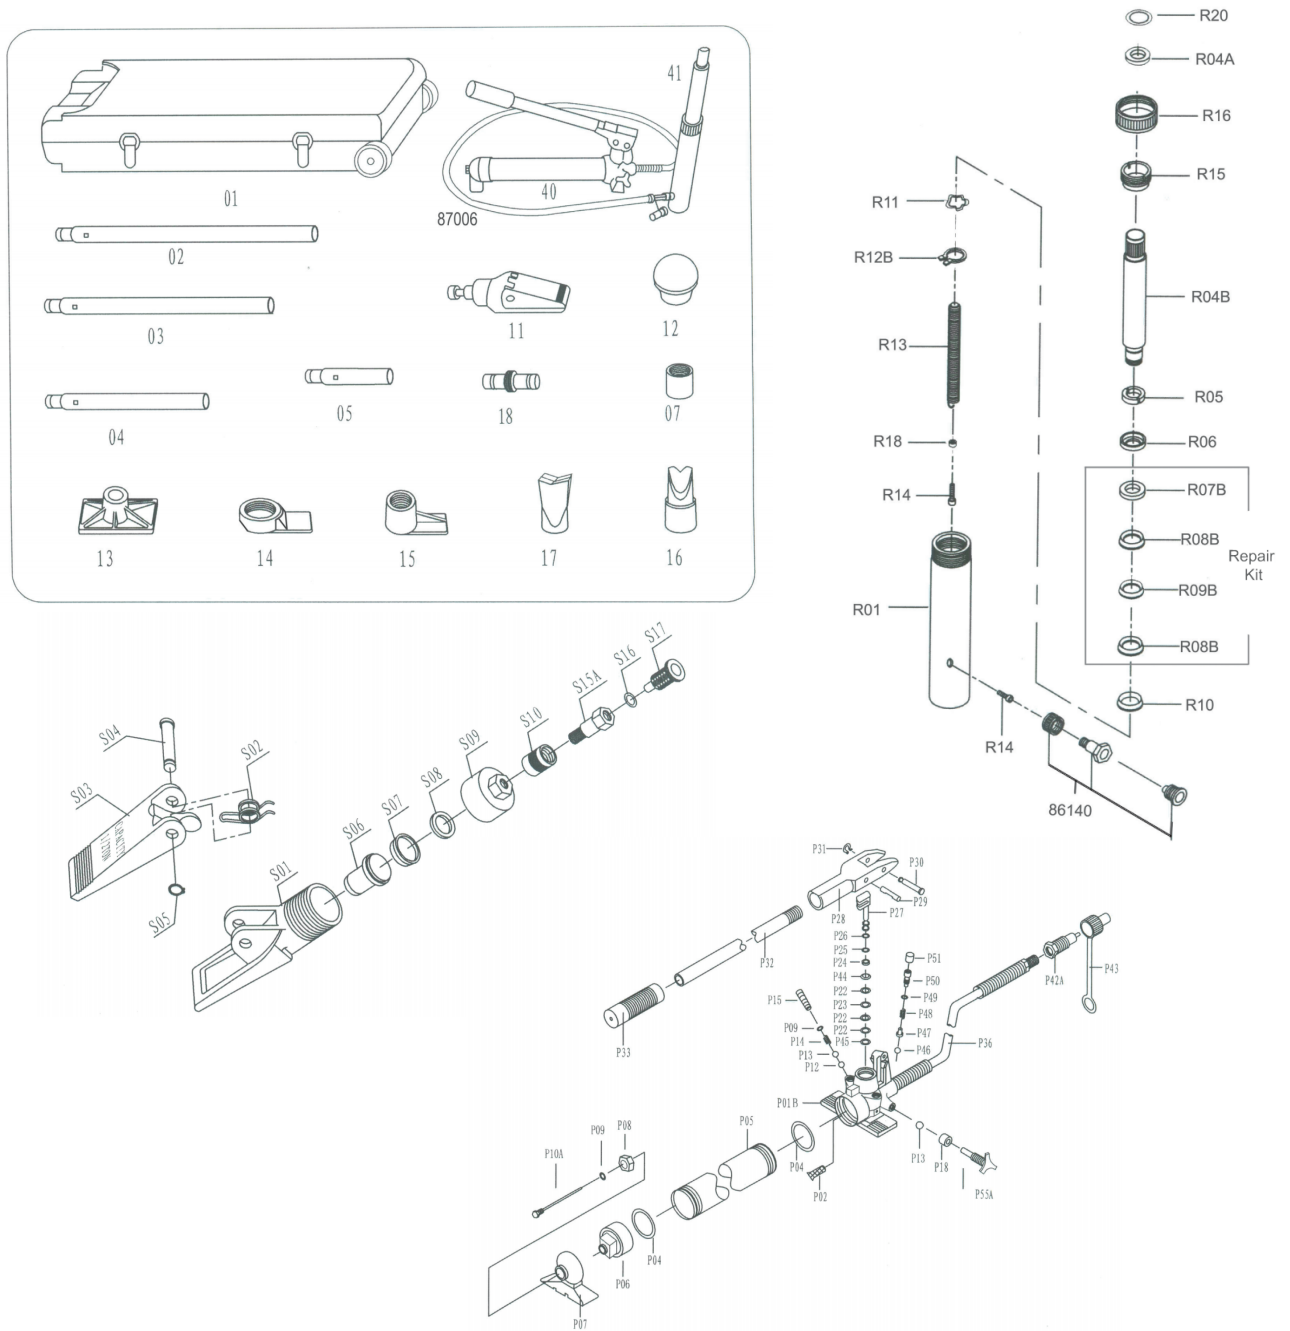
Hydraulic Body Repair Frame Kit Parts
